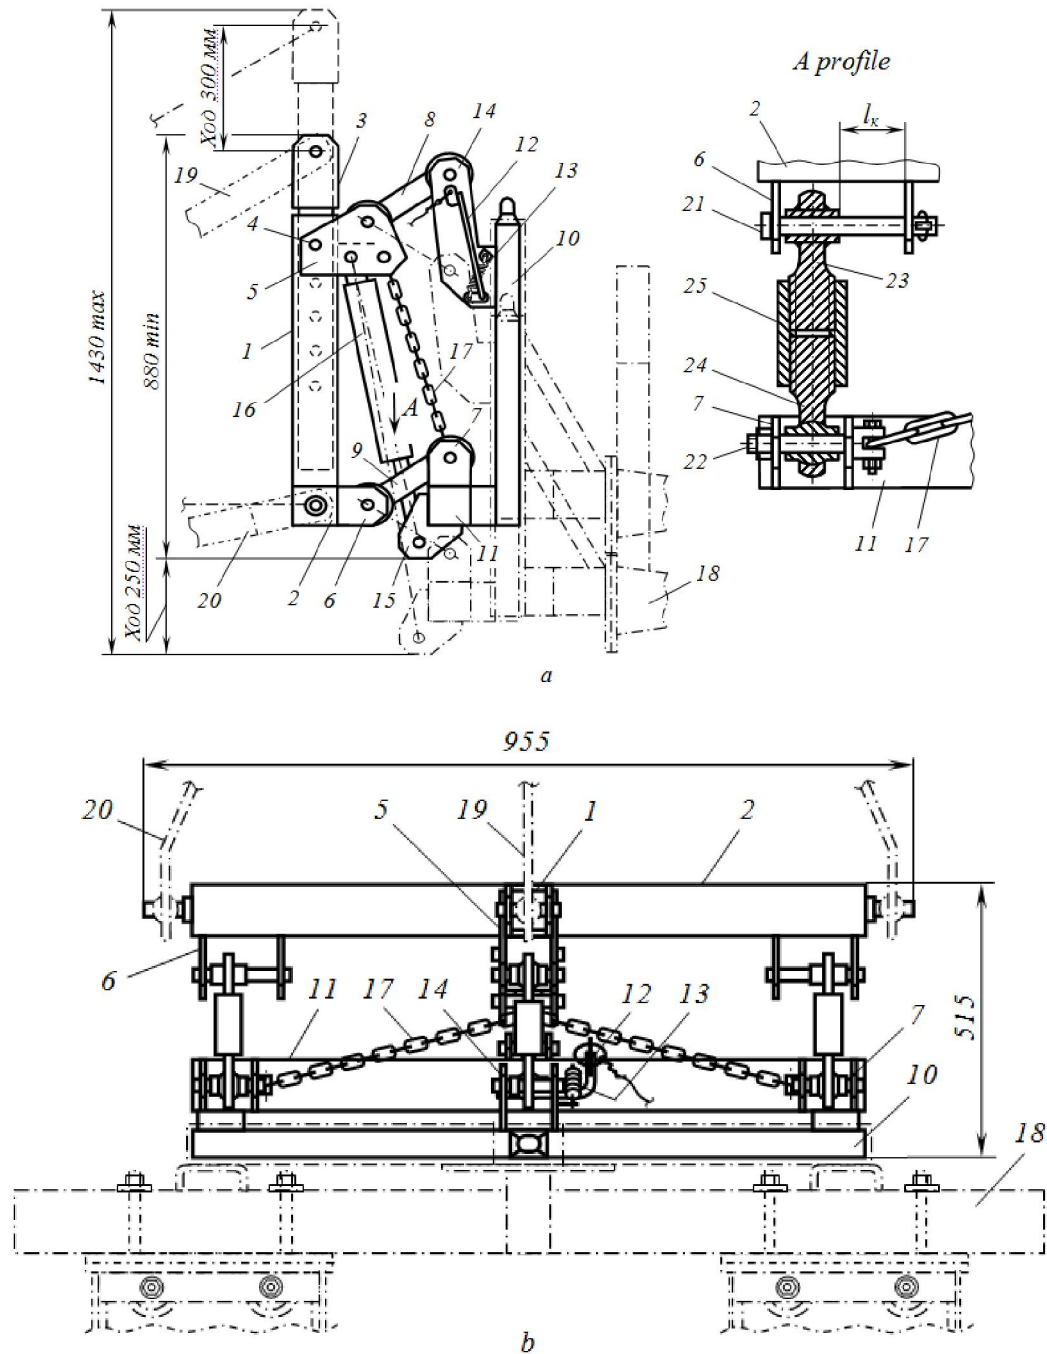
Tool hydraulic PGNA to hitch tractor with disc Unitized his guns equipped with a coupler: a, b - side and top views; 1 and 2 - the vertical and horizontal bars of the frame; 3 - retractable stand with pro-Ushin; 4 - clamp; 5 - an arm; 6 and 7 - eyelets; 8 and 9 - the upper and lower control arms; 10,15 - respectively connecting triangle, beam, handle lock, springs, upper and lower brackets frame coupler; 16 - cylinder; 17 - chain; 18 - cultivator; 19 and 20 - the upper and lower link hitch of the tractor; 21 and 22 - the fingers; 23 and 24 - and a cylindrical head with a spherical bushing; 25 - threaded bushing
